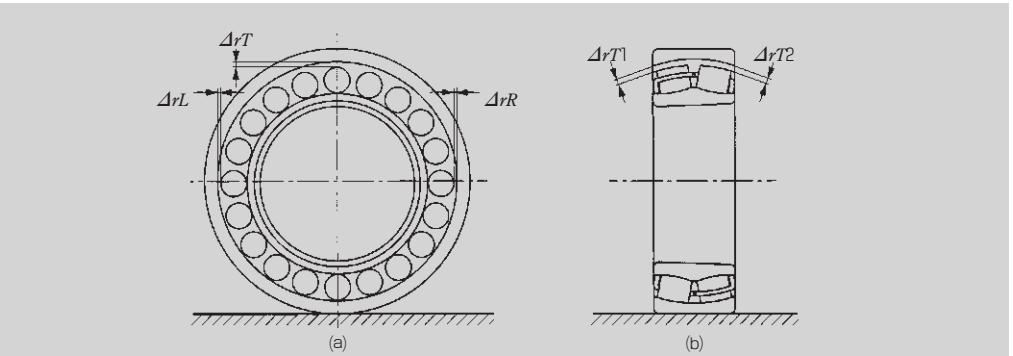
Clearance Measurement Points (Bearing Outside Diameter: Larger Than 200 mm)
